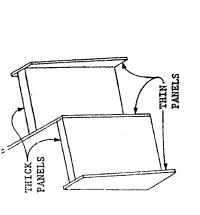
TYPICAL OFFICE OR EXHIBIT PANELLING Wherein Thicker Members are Joined to Thin Receivers at 'T' s & corners
